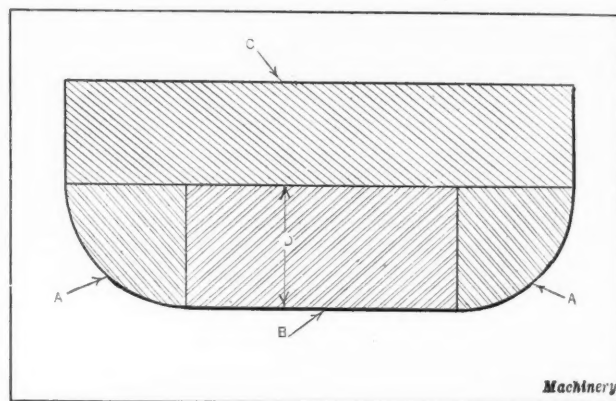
Cross-section of Punch Used with Die for Forming Torque Tube
